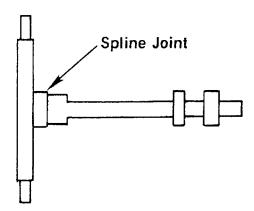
Hot gas expander wheel and shaft constitute the rotor. Note the splined engagement.
